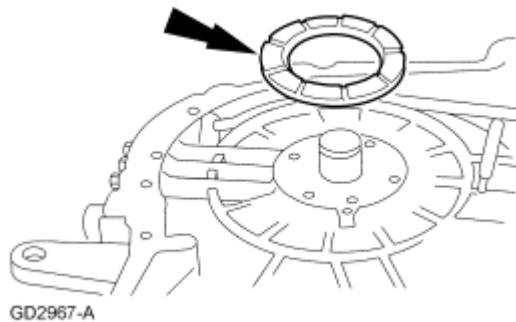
No. 10 Drive Sprocket Thrust Washer
